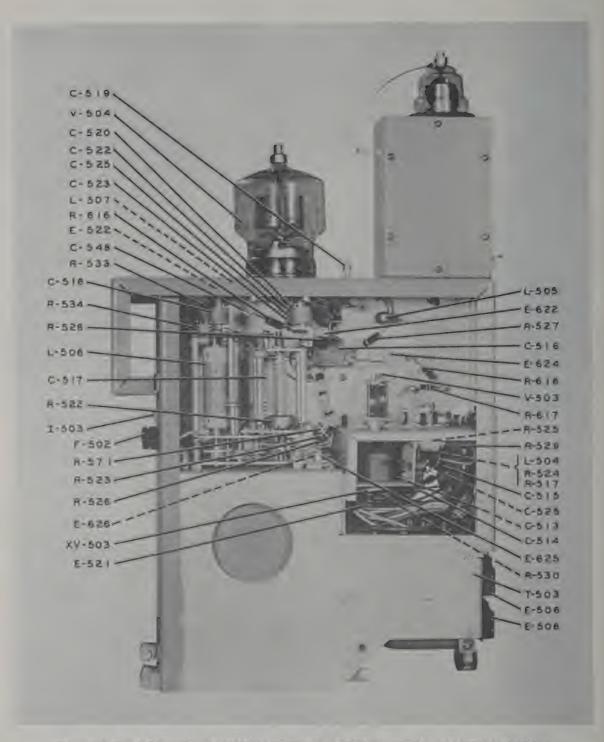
Radio Transmitter T 454/FRT 26, Buffer, Multiplier, and Driver Unit, Right-Side View.
